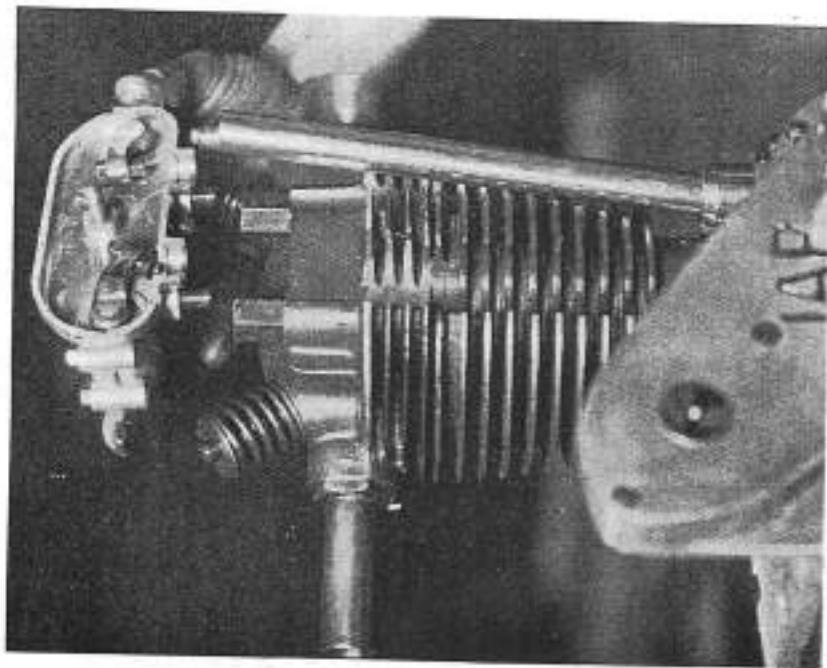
TAKING THE ROCKER-BOX OFF THE CYLINDER HEAD
